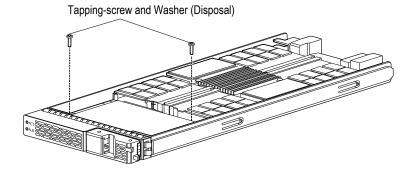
Removing Tapping-Screws and Washers
